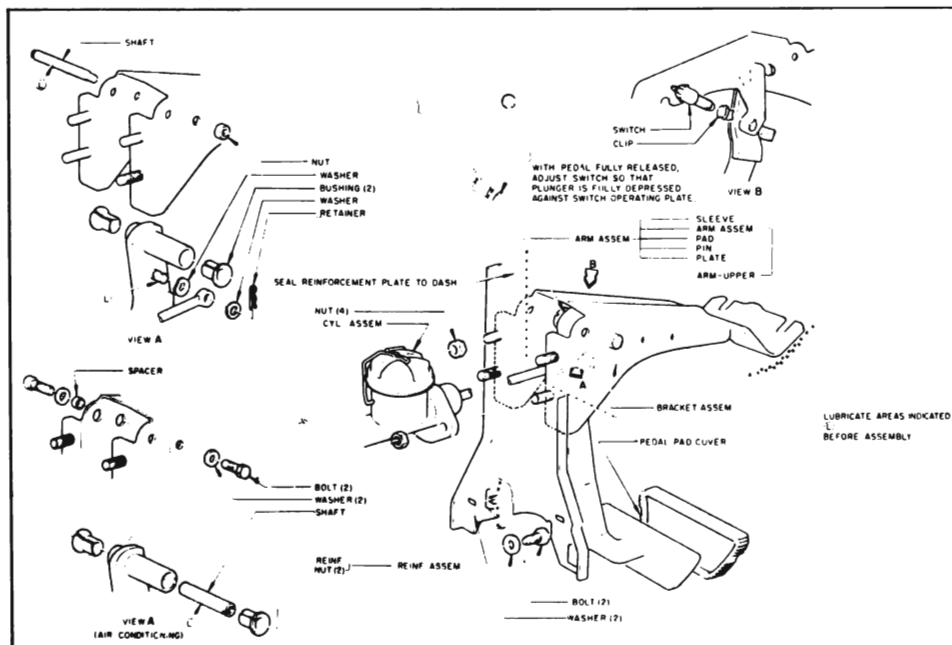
Standard Brake Pedal and Master Cylinder Installation (Automatic)
